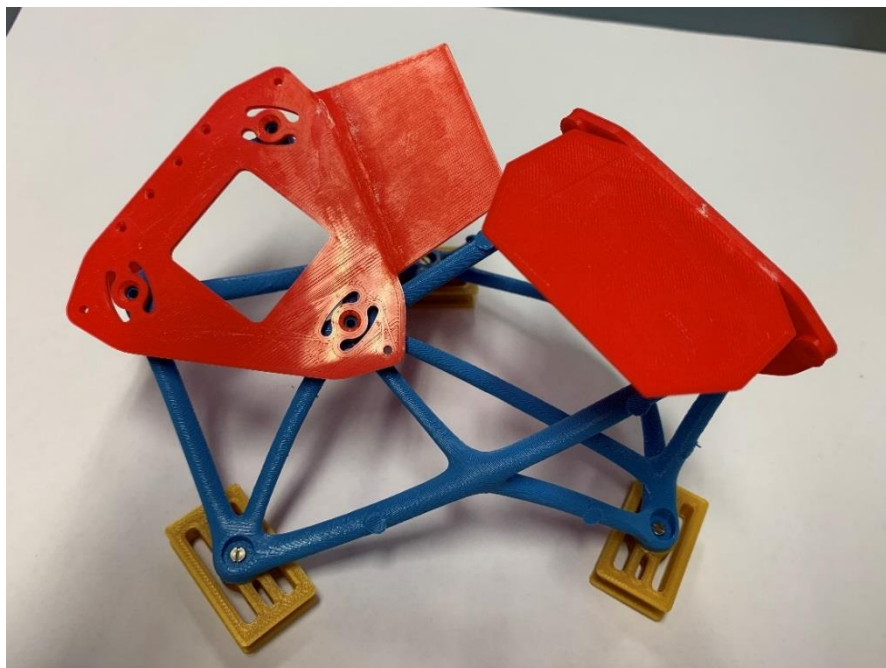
3D printed demonstrator of the Star Tracker Bracket design
